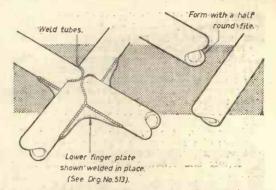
(left). - A cross-over joint in tubes. (right). -Shaping one tube end before welding to a second tube.
